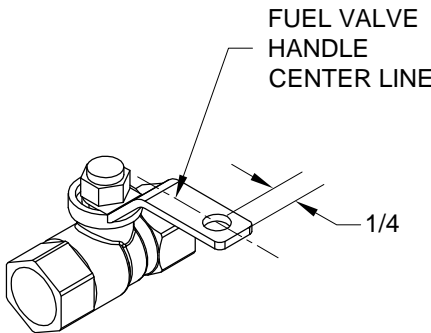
DRILLING THE FUEL VALVE 4161089 HANDLE
